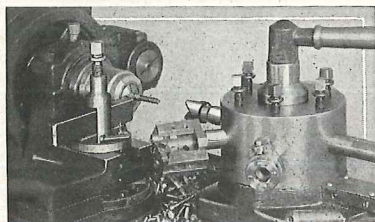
Using a Draw-in Chuck and Turret for Making Small Screws
